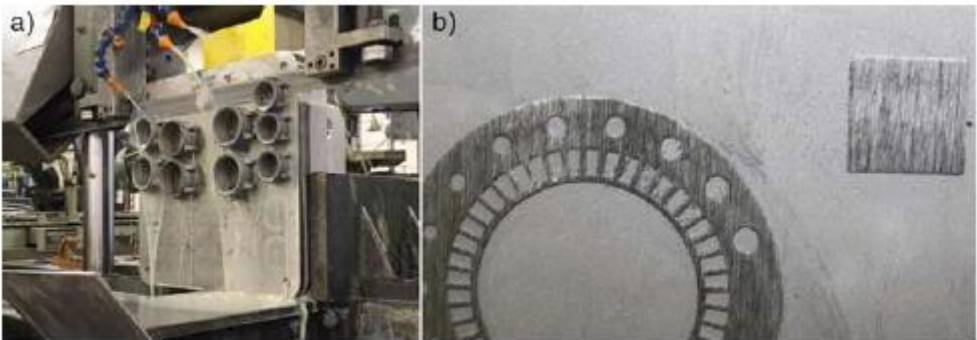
a) Band saw cutting parts from build plate. b) Build plate surface after parts removed.
